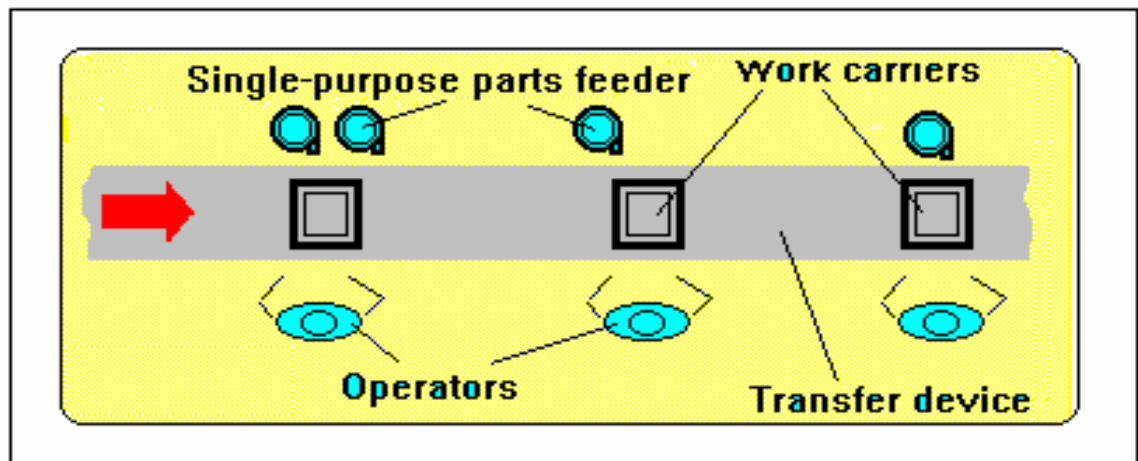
Manual Assembly with Mechanical Assistance (MM),
